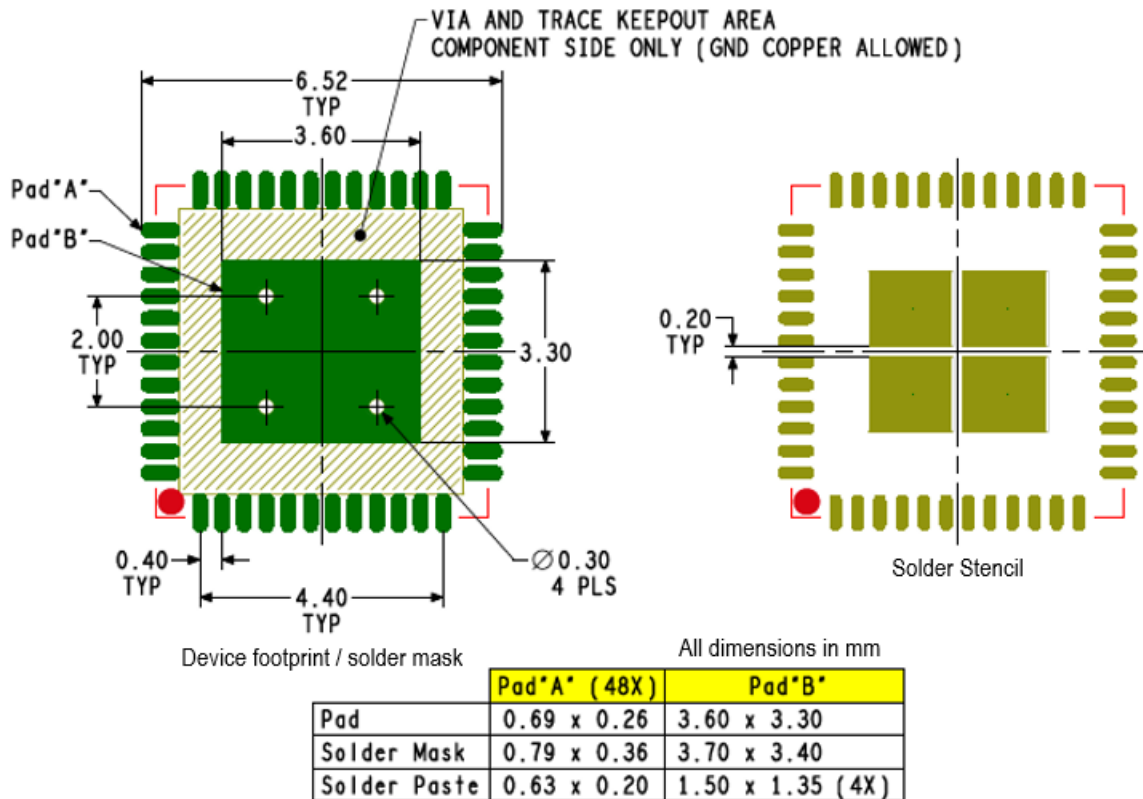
48-Lead QFN Package Paddle Dimensions (sawn and punched)
